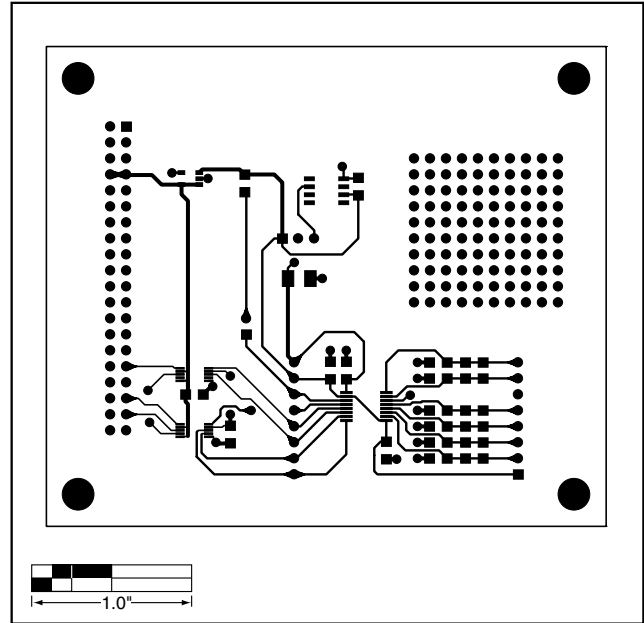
MXB7846 EV Kit PC Board Layout—Component Side
